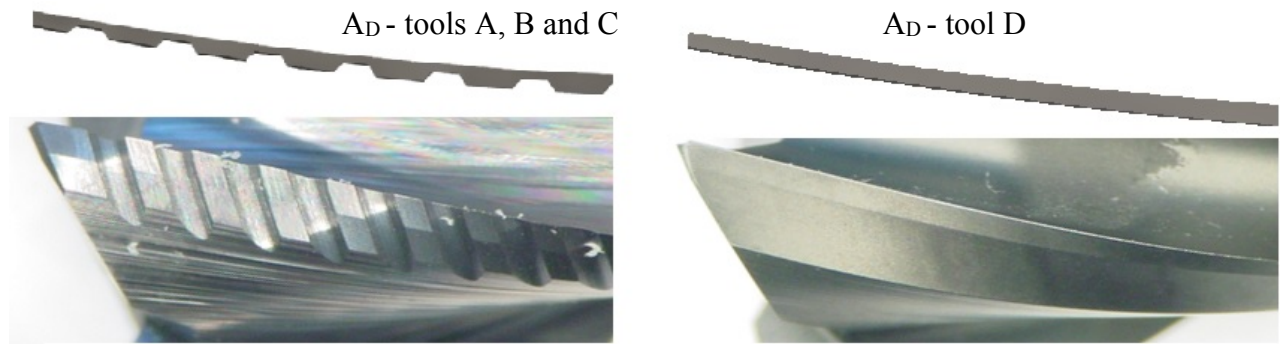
The geometry of tested milling cutters and examples of calculated chip-cross sections
